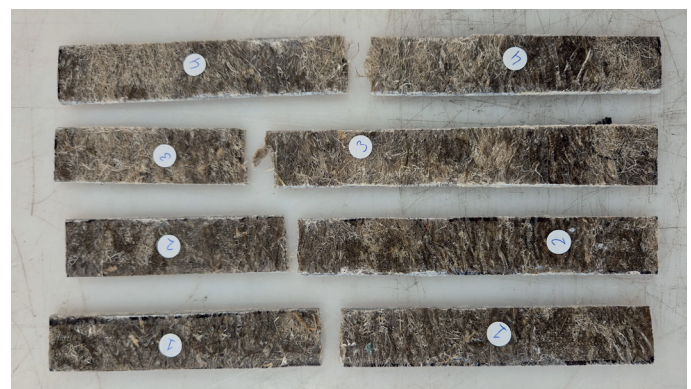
Fracture specimen 6-9 after tensile test (own image)
